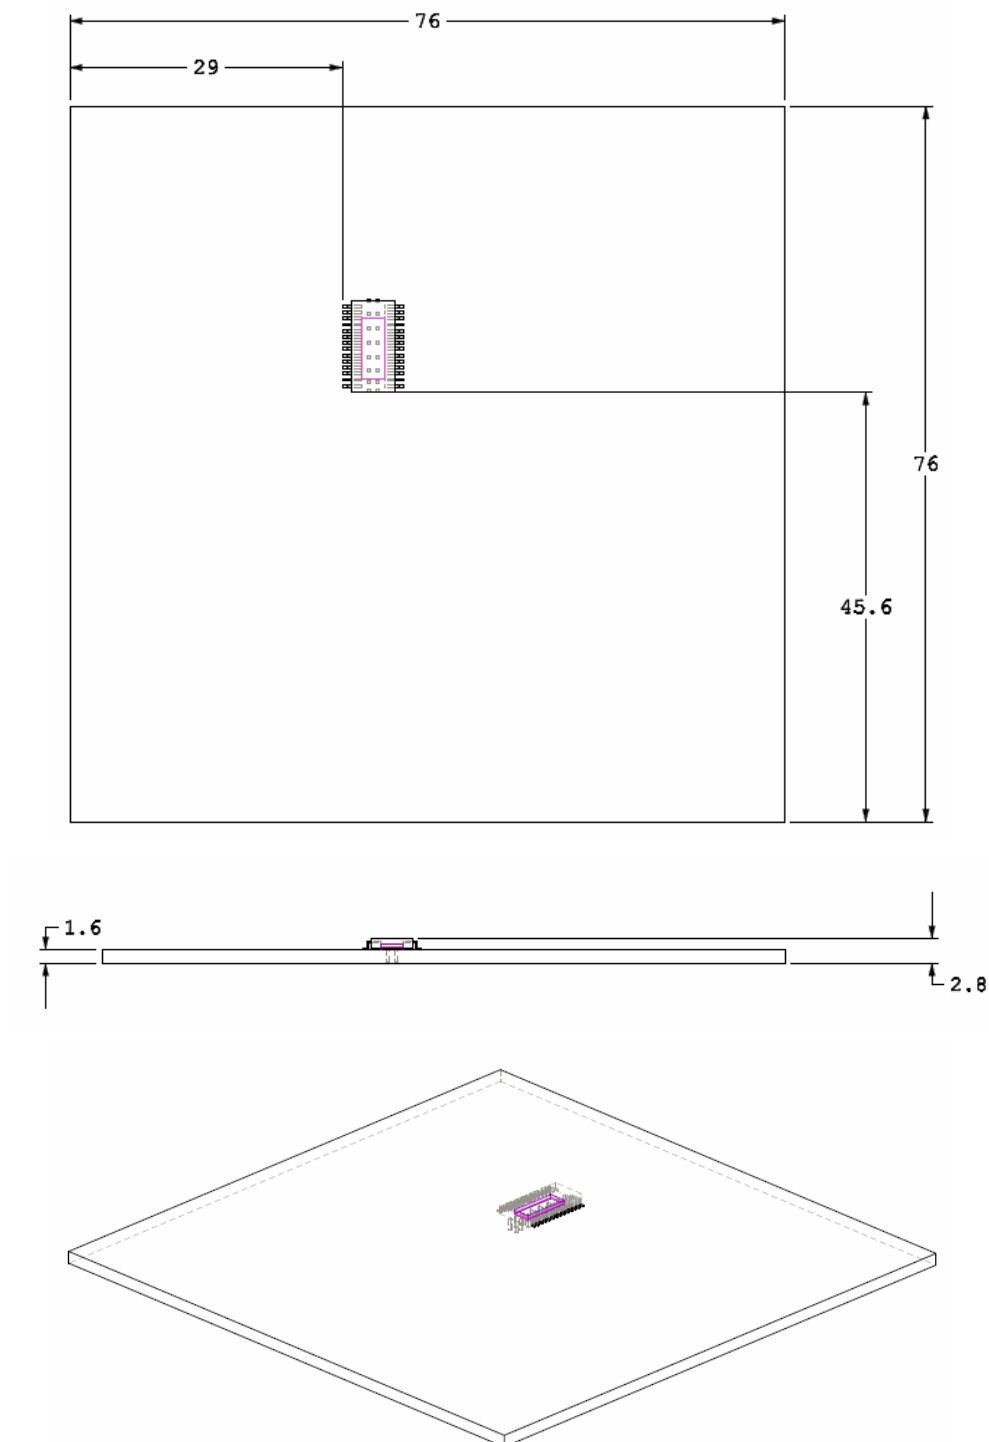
External dimensions of the TPS54610 PCB and location of the TPS54610 DCDC converter on PCB
